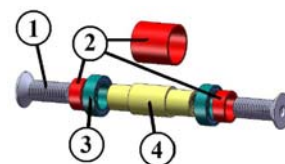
CAD representation of joint components M4 screw, bearings and bearing plates
